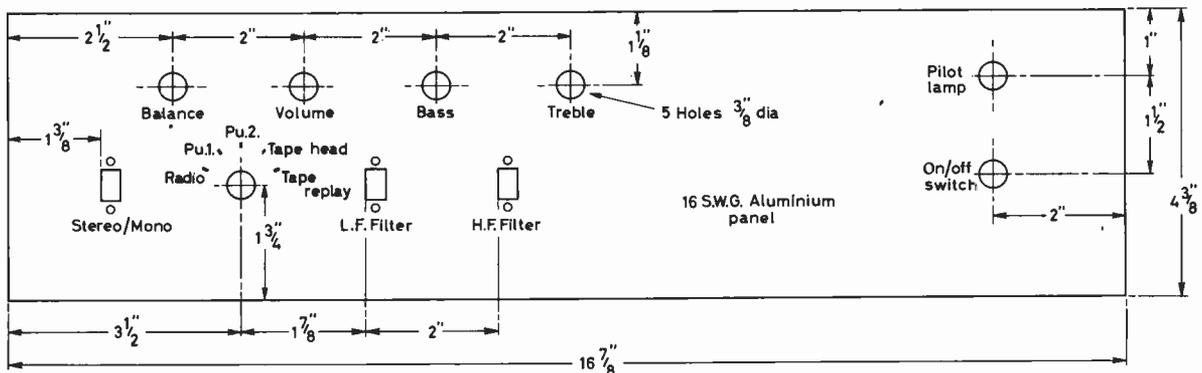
Panel drilling information. Cut-outs for switches will depend on actual components used.
